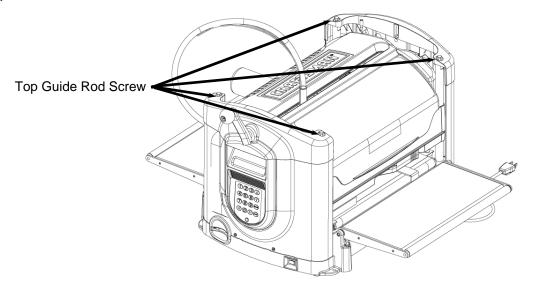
LOCATION OF TOP VERTICAL GUIDE ROD SCREWS
